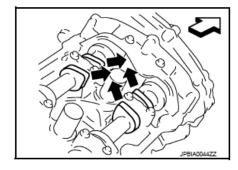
Identifying Intake And Exhaust Cam Nose On No. 1 Cylinder Courtesy of NISSAN NORTH AMERICA, INC.
